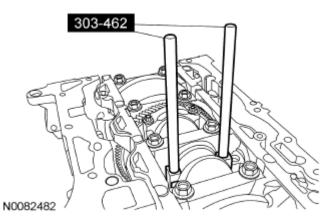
Locating Connecting Rod Cap Bolts Courtesy of FORD MOTOR CO.
